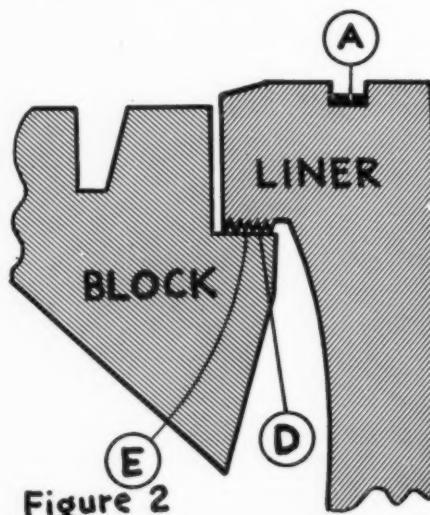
A, Cylinder head gasket. E, No gasket used; expansion and contraction of liner wipes seat. D, Bottom of liner serrated.
